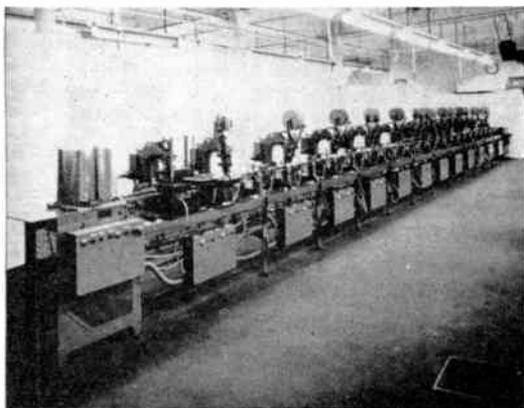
An Automatic Conveyor with fourteen component inserting stations, Pallet Stack, Board Loading and Unloading Machines.
